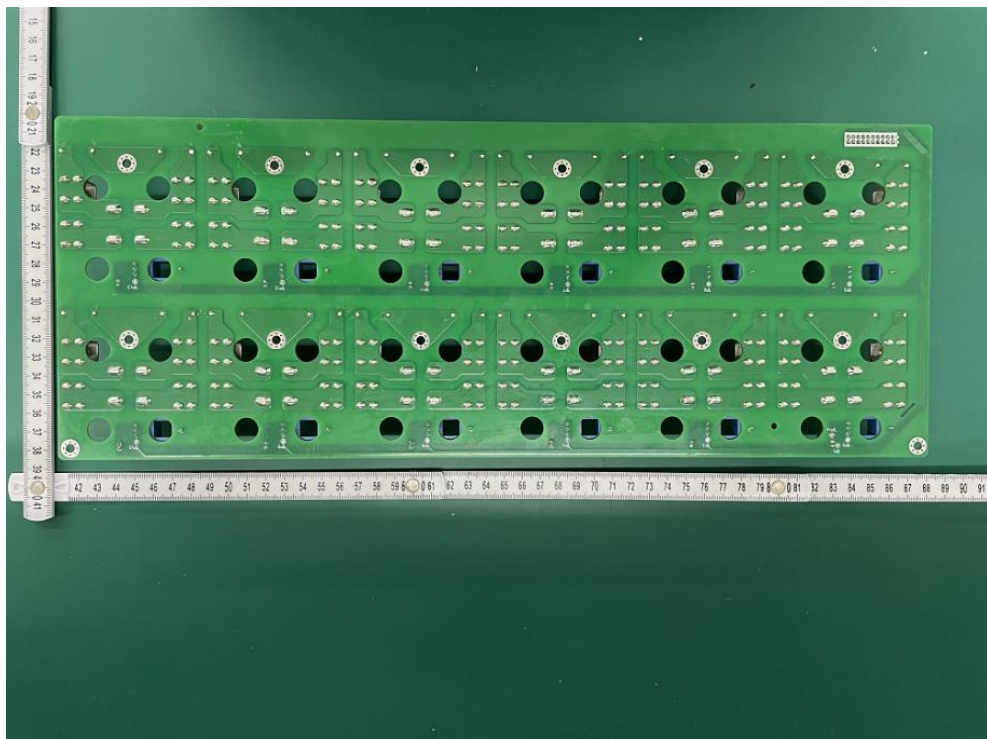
Back view of PV input board for C6-70K-T12-LV-40
